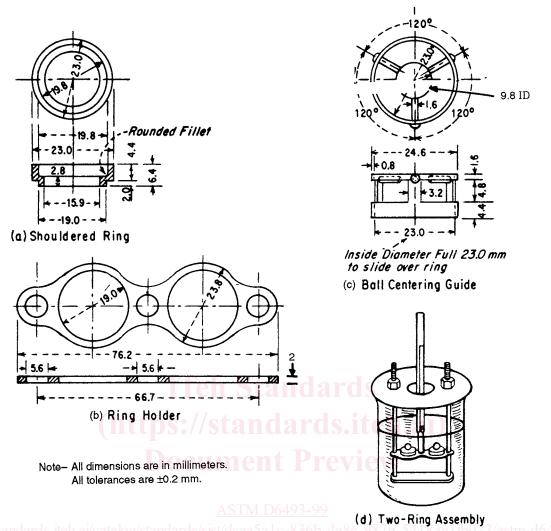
Shouldered Ring, Ring Holder, Ball-Centering Guide, and Assembly of Apparatus Showing Two Rings
